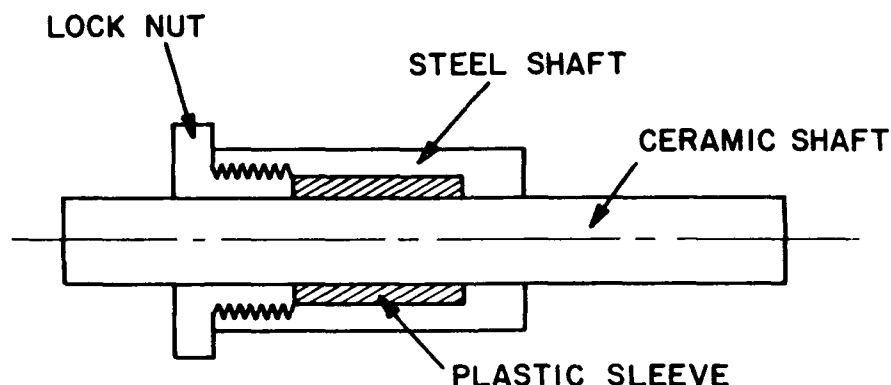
Second design non-threaded high expansion lock bench test rig.
